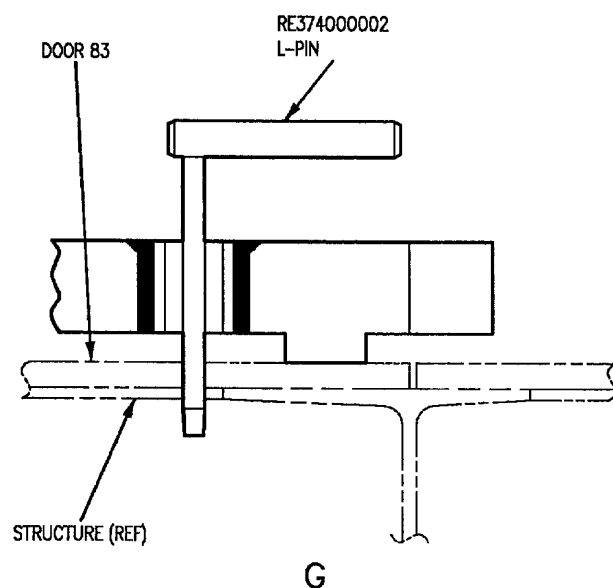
Installation of Plate Set for Drilling Door 83 and Substructure (Sheet 2)
